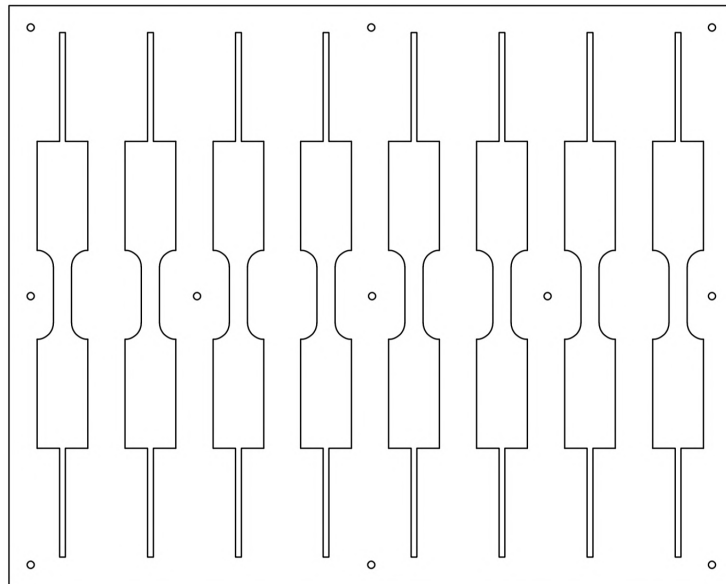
Molds for specimens for uni-axial tensile test drawn in Autocad, with the intension of 3D printing or laser-cutting plexiglas for assembly
